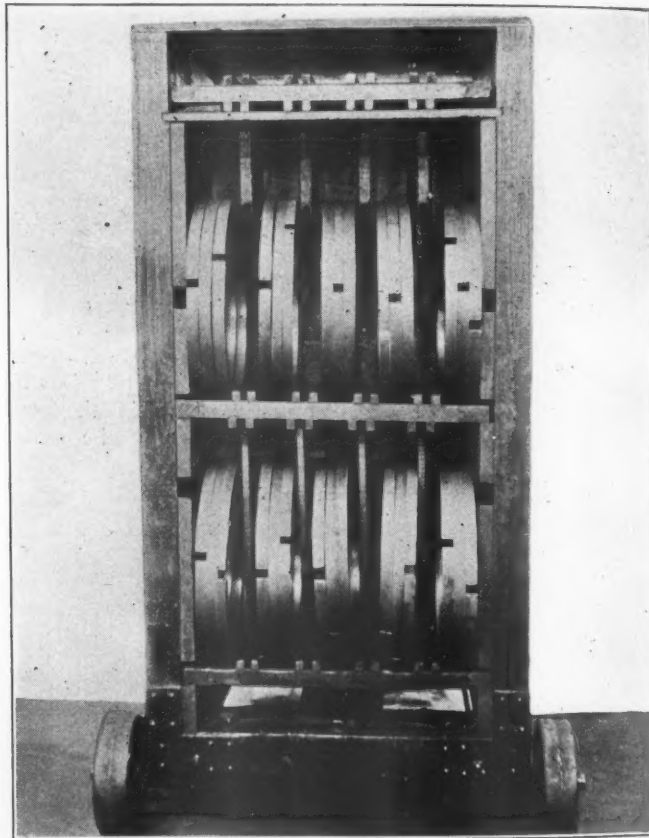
Portable Cabinet in which Valve Packing Rings Are Placed as Completed
